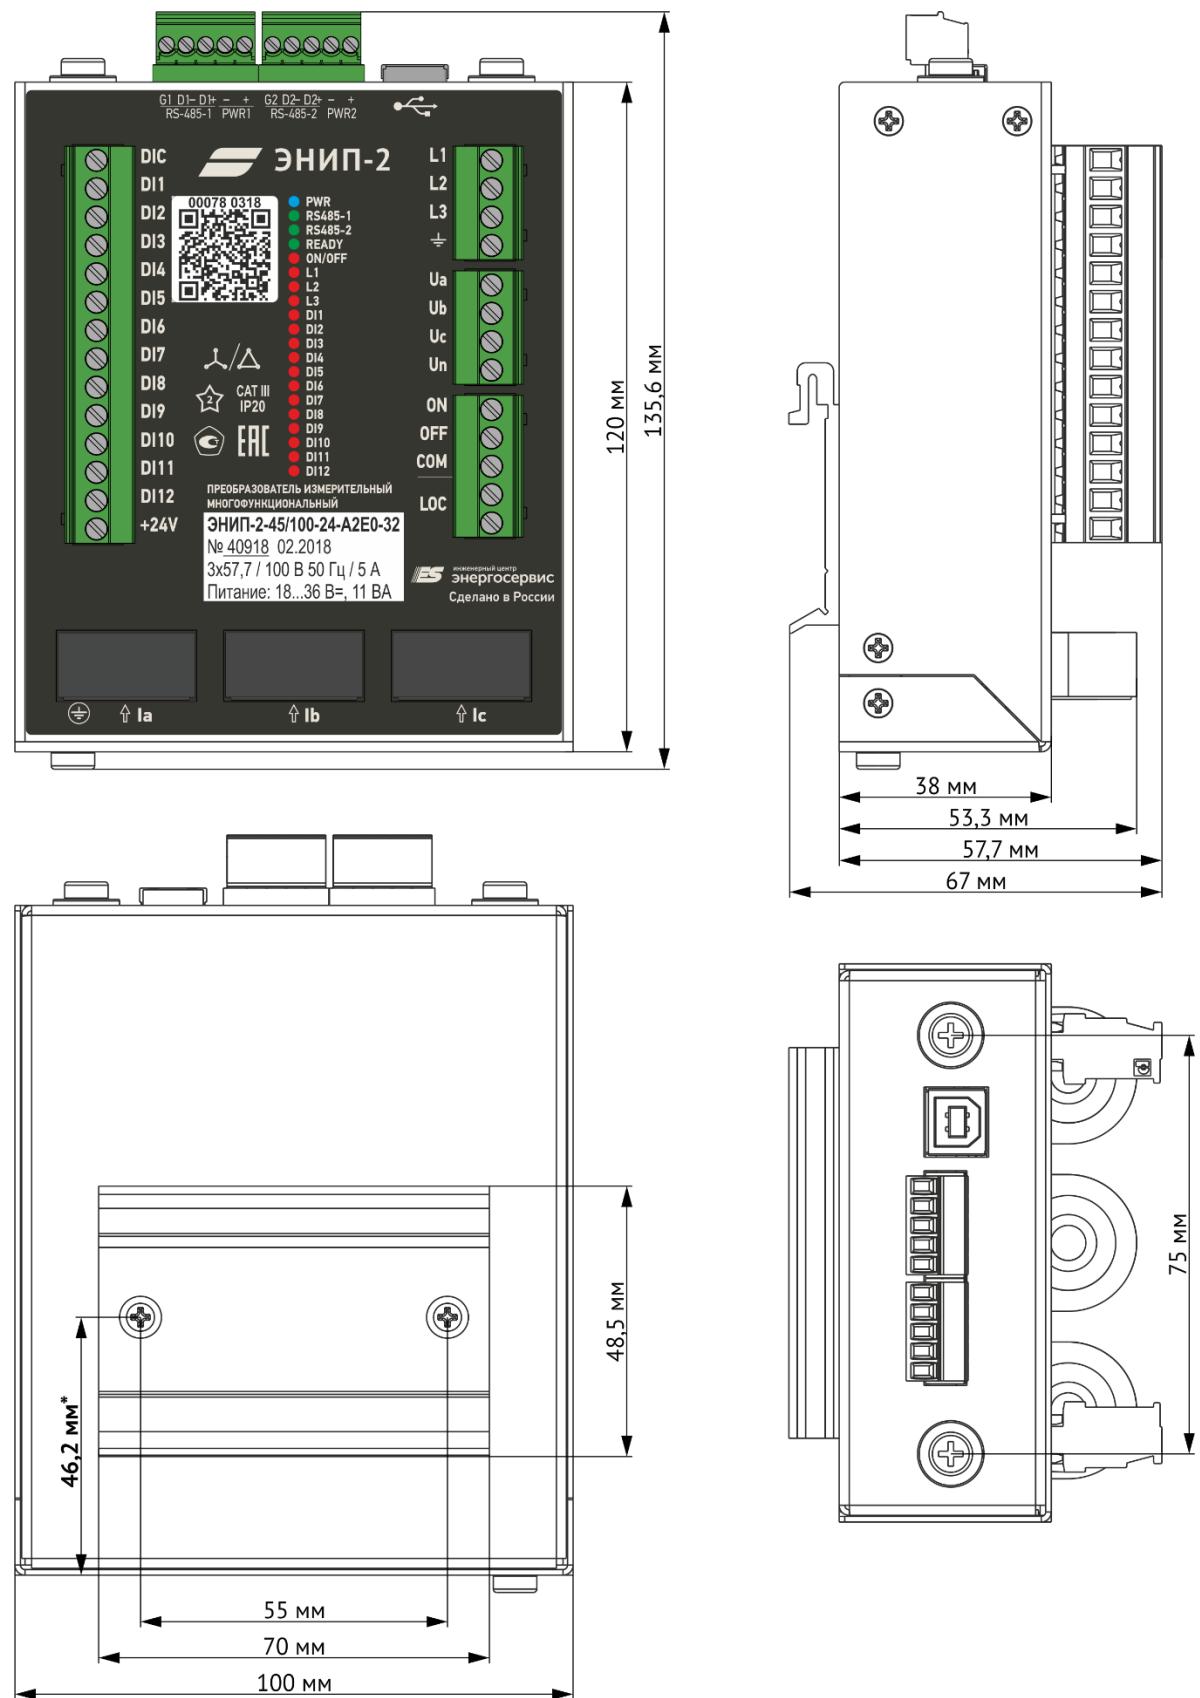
Dimension of ENIP-2 Compact, mm (ENIP-2-45/100-24-A2E0-32 front panel)
